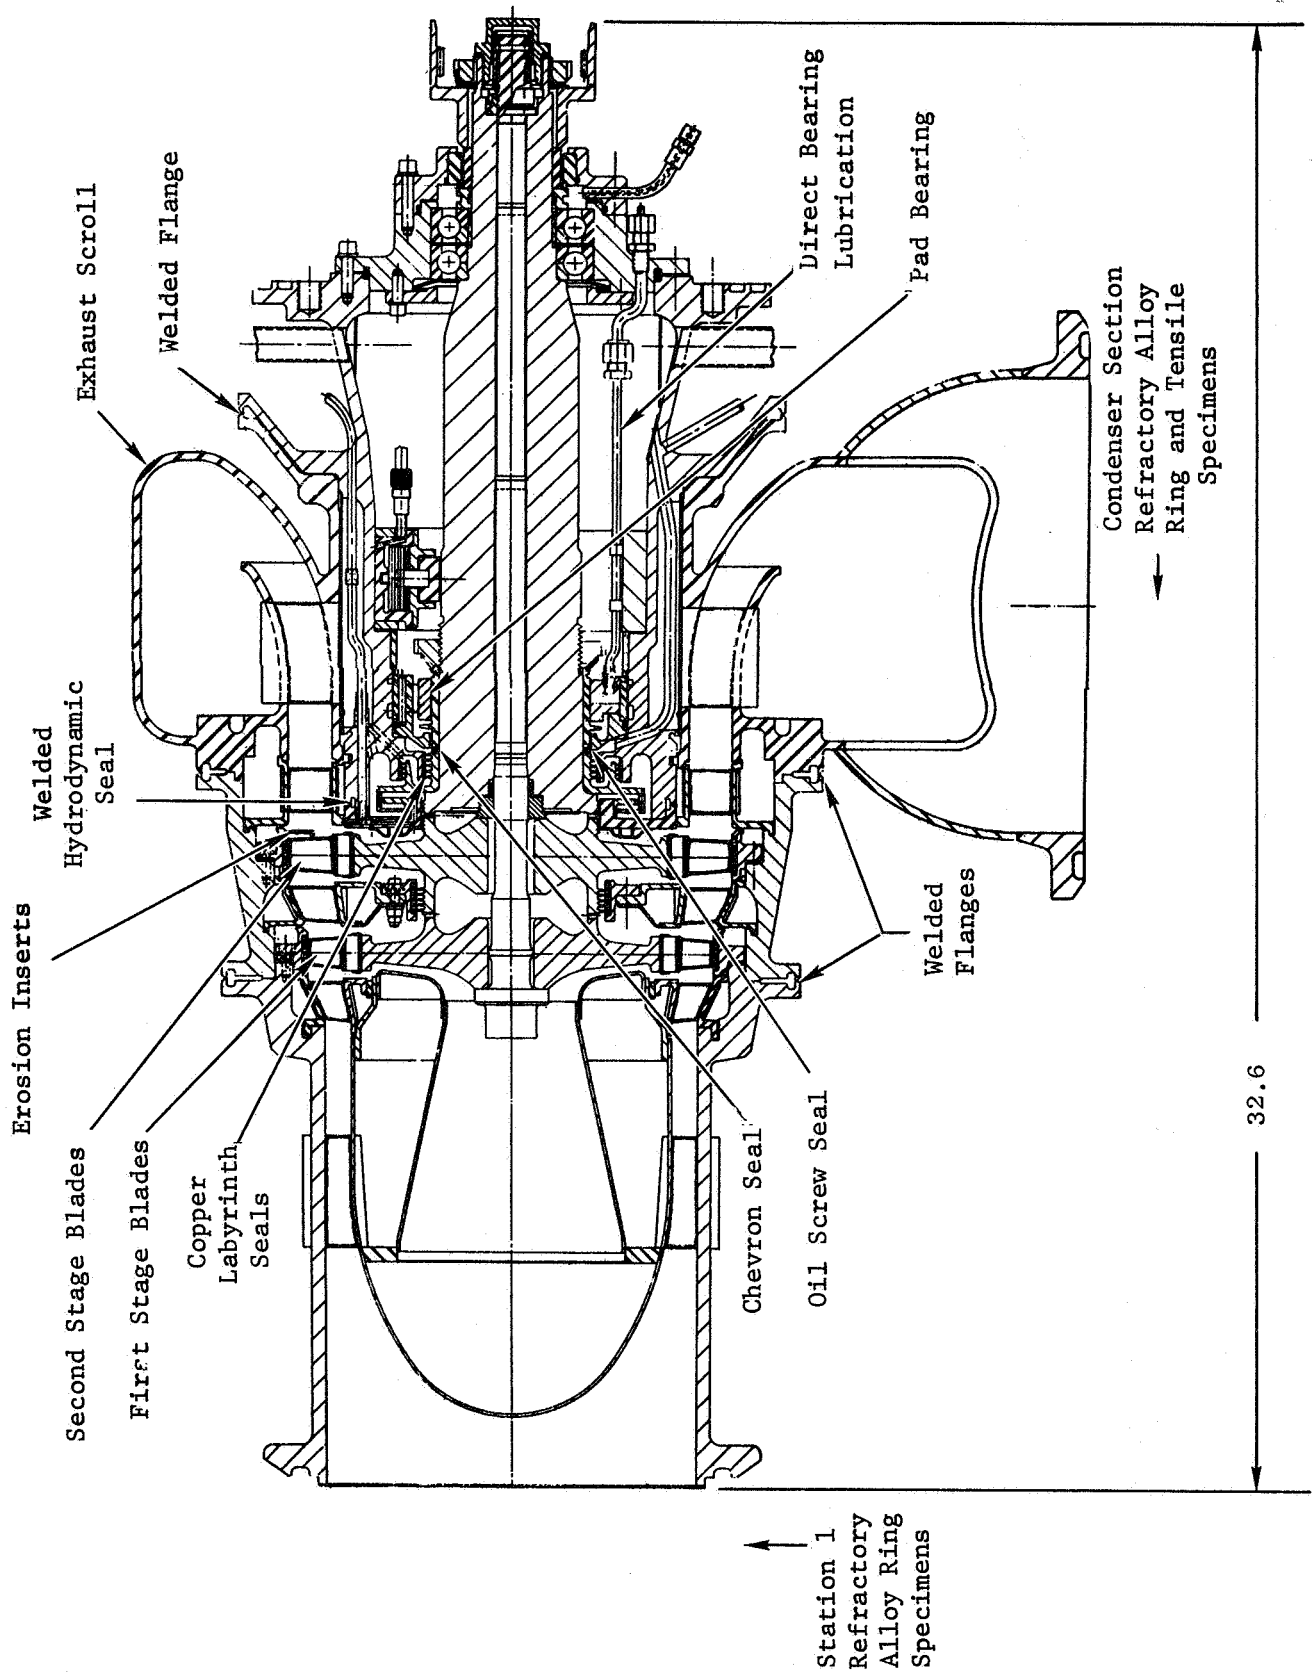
Cross Sectional View of Potassium Test Turbine Showing Final Design.
